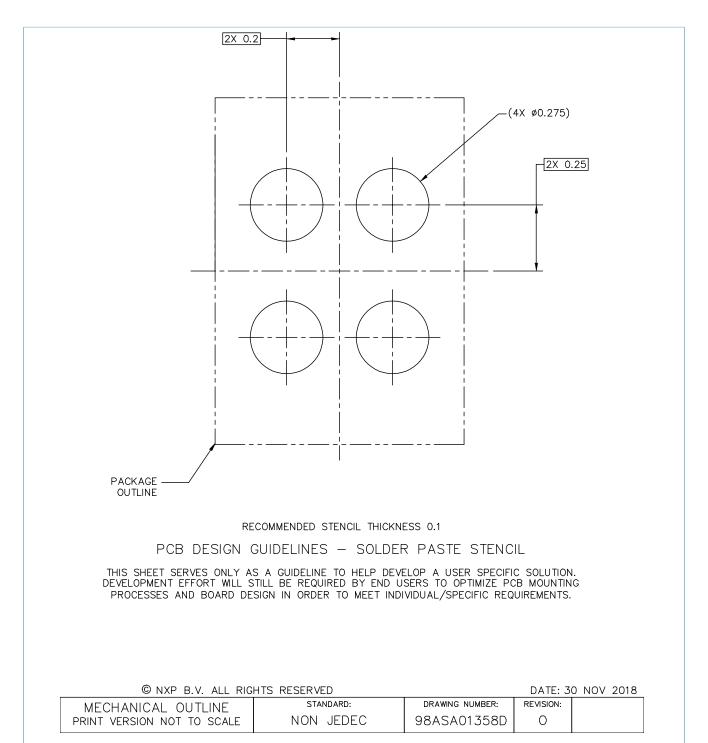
Reflow soldering footprint part3 for WLCSP4 (SOT1375-5)
